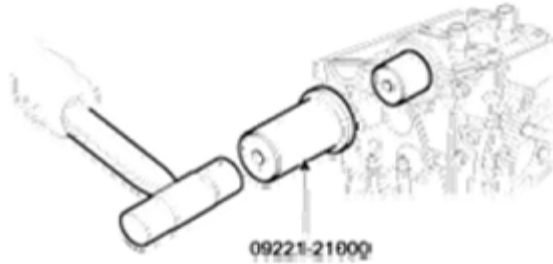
Installing Camshaft Bearing Oil Seal Using SST
